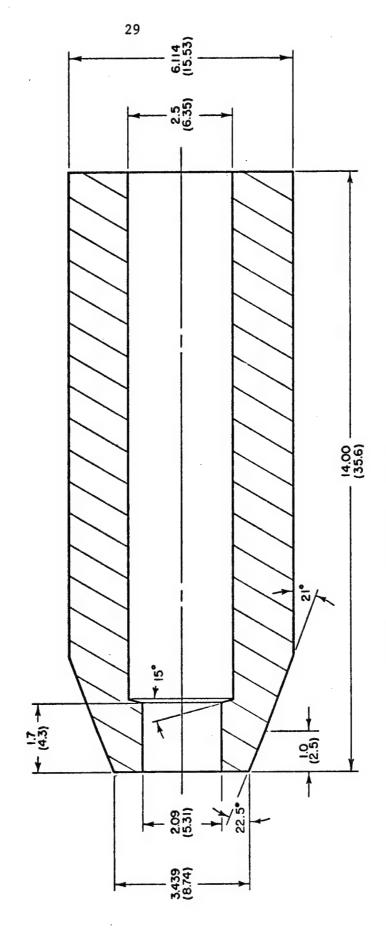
EXTRUSION PREFORM, ORIGINAL DESIGN
